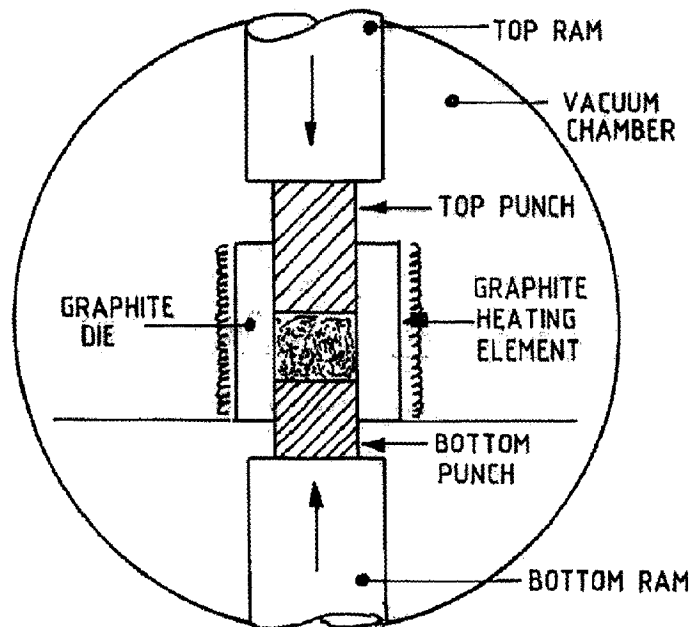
Typical hot pressing set up used with GCA vacuum hot press.
